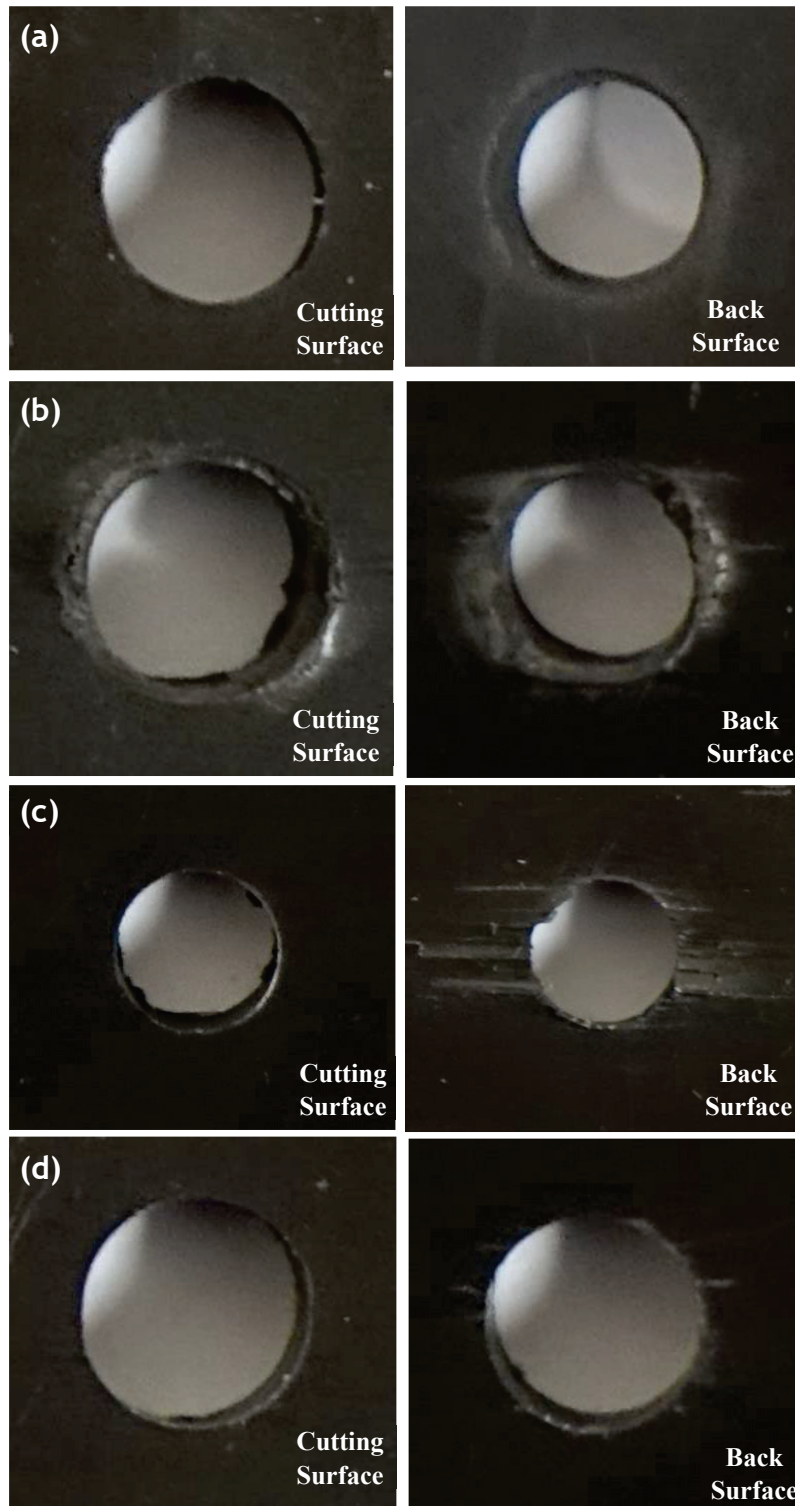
Cutting surface and back surface pictures of drilled holes with (a) water jet (b) milling machine with pointy tip (c) milling machine with bump tip (d) CNC milling machine with bump drill bit
